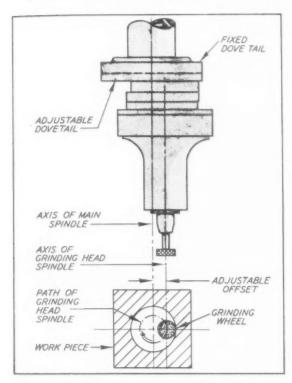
Planetary movement results from eccentric positioning of the high-speed spindle relative to the axis of the slow-speed main spindle. The latter determines the axis of the hole. This construction permits outfeed.
